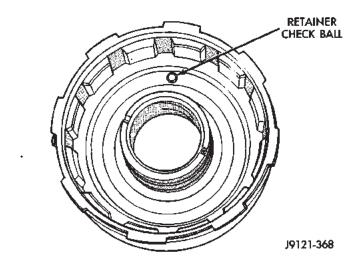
Front Clutch Piston Retainer Check Ball Location
